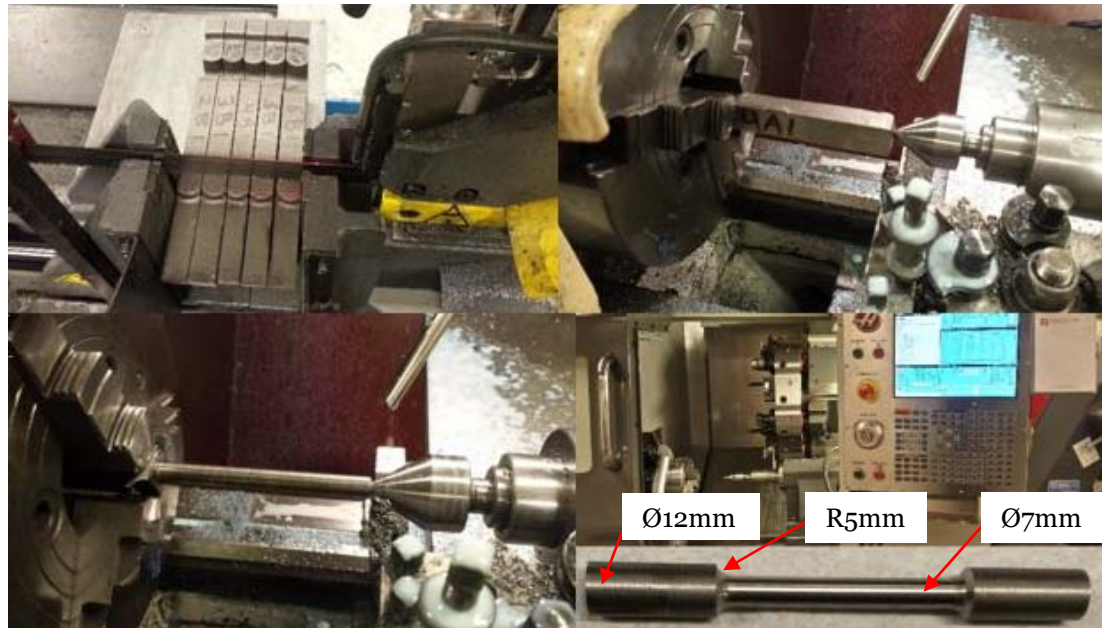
The tensile test bars were cut into rectangular cuboids which were then lathed to cylinders and given its final shape with the necking in a CNC-lathe machine.
